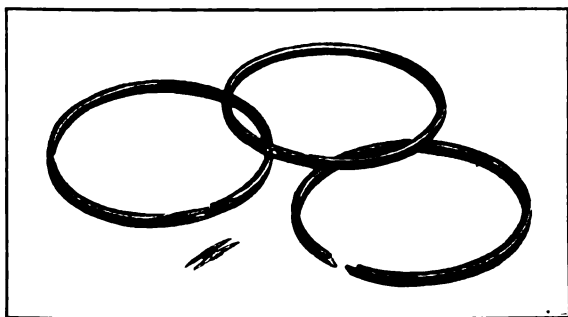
SAMPLES OF BURD TYPE PISTON RINGS
